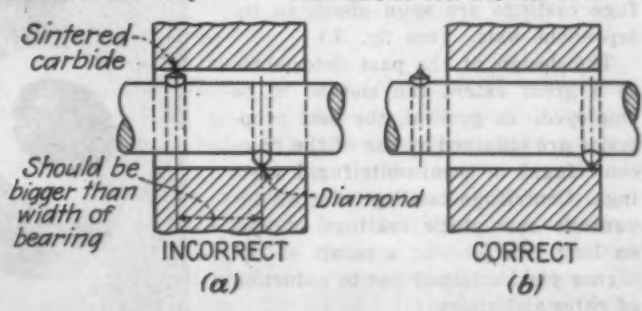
Combined used of diamond and carbide tool: (a) Incorrect; carbide and diamond cutting simultaneously. (b) Correct; diamond starts cutting after carbide tool has left hole.
